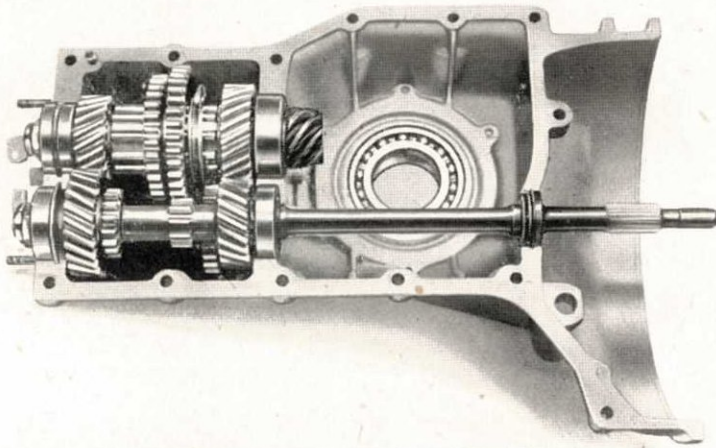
(above).—Gearbox and gears (assembled in L.H. interior casing)
